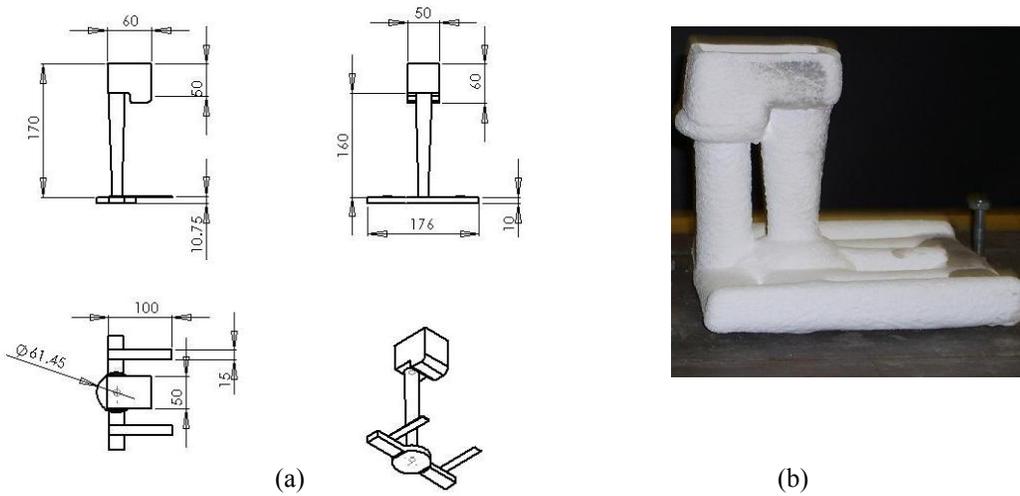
(a) Mould design for fluidity test strip thickness 0.75mm metal height 170 mm, pouring temperature 450°C, mould temperature 660°C-700C (b) ceramic mould
